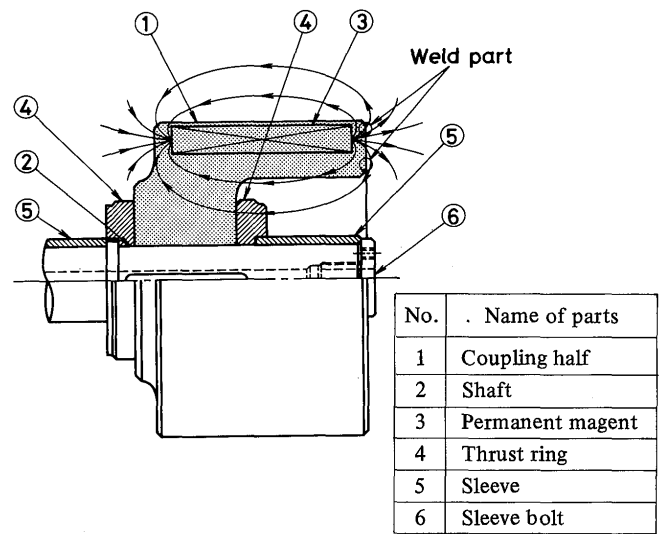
Coupling half of a magnet drive centrifugal pump and the weld parts, which are shown by a symbol ○.
